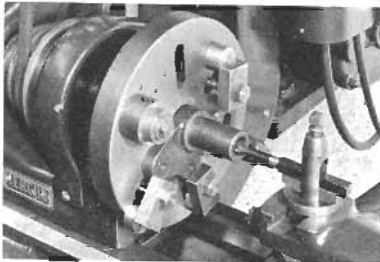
Machining a Component clamped to the Lathe Faceplate
